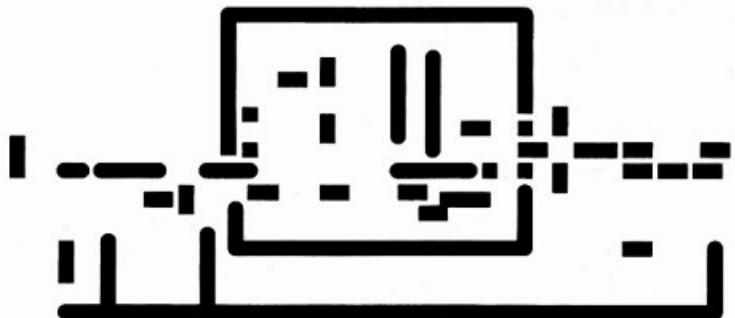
PCB layout and parts placement. Scale to the 141 mm dimension given.
